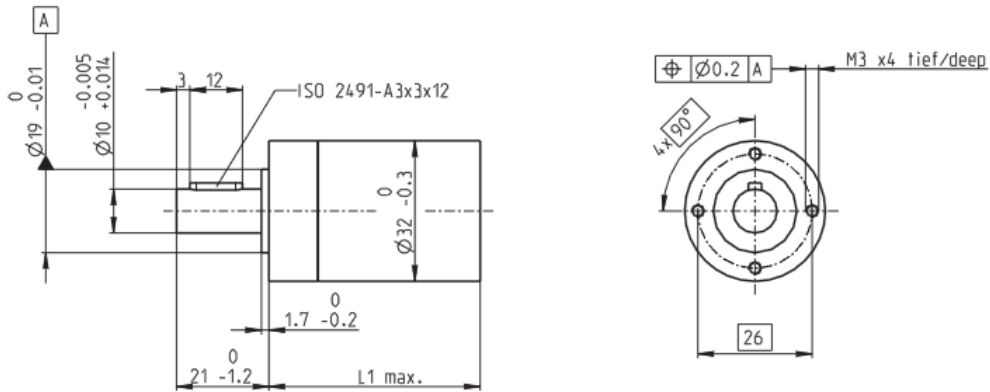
Planetary gearhead Maxon GP-32 HP (324942) [5].
